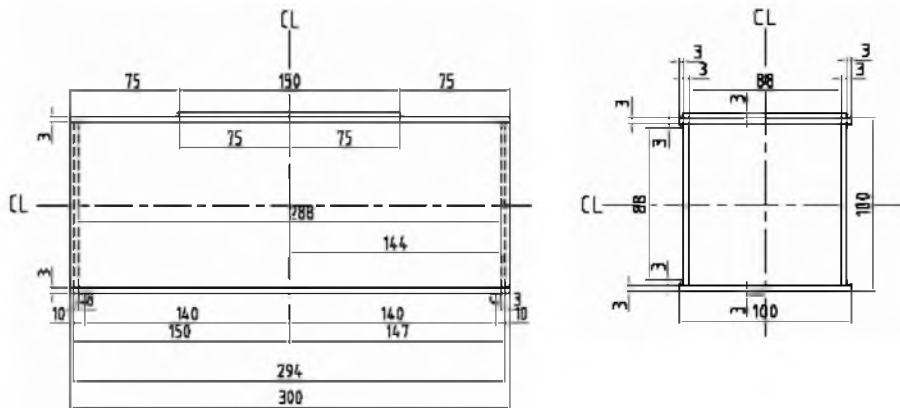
Geometry of the welded box structures of loading wheels.
